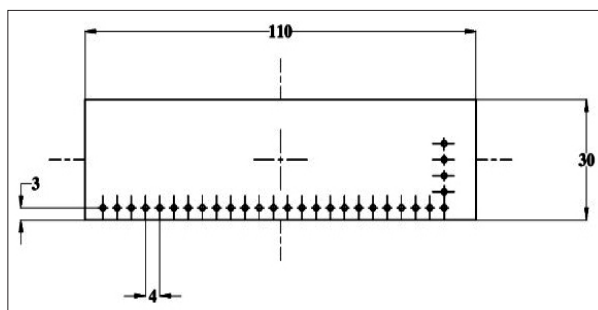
Drawing of the work piece AUTOCAD 2013 [All dimensions are in 'mm'].
